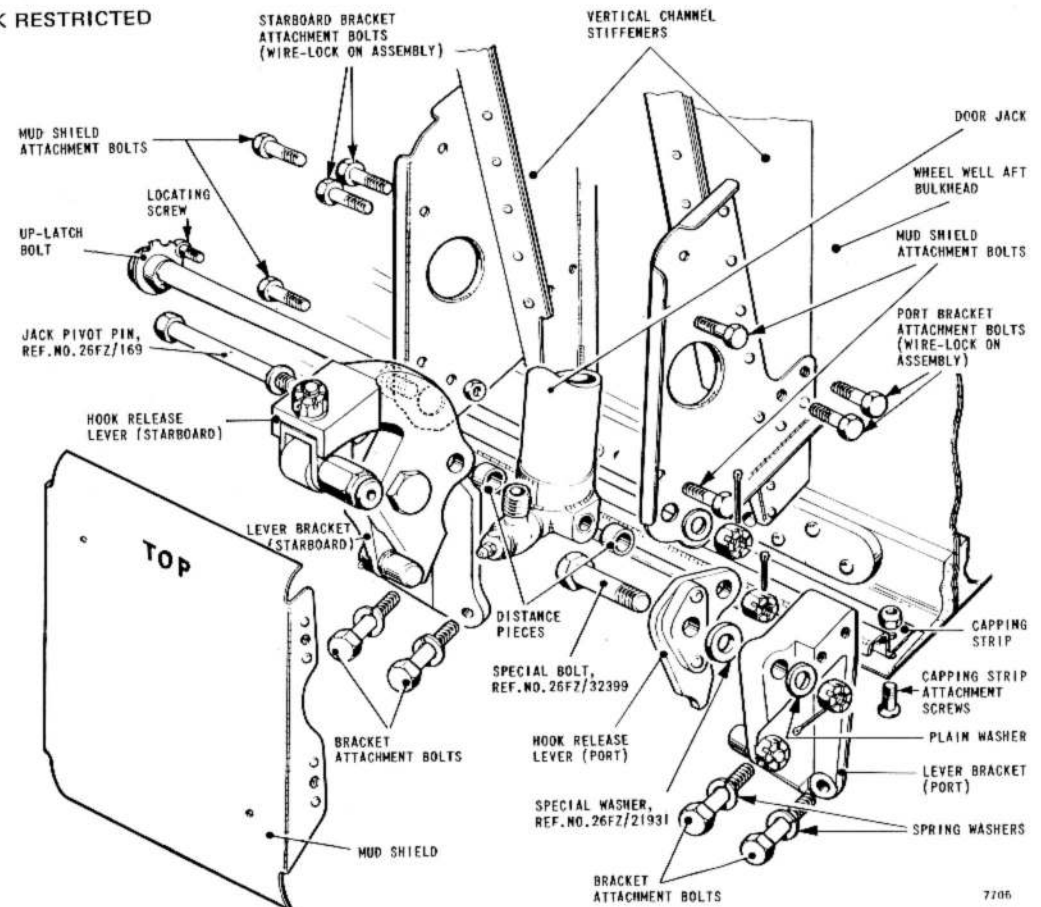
HOOK RELEASE MECHANISM & DOOR JACK REMOVAL
